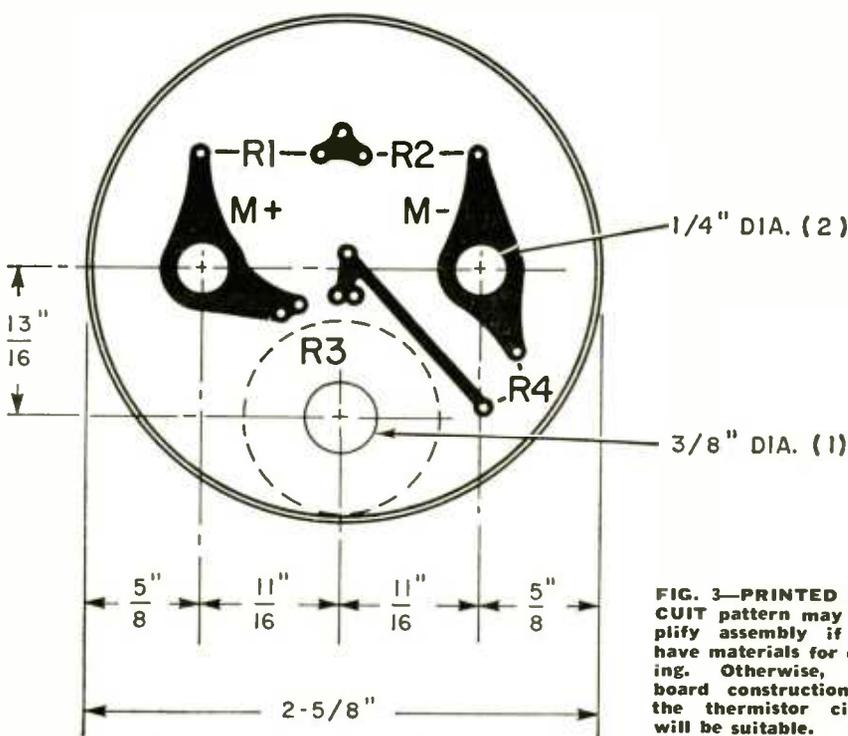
PRINTED CIRCUIT pattern may simplify assembly if you have materials for etching. Otherwise, perf board construction for the thermistor circuit will be suitable.
